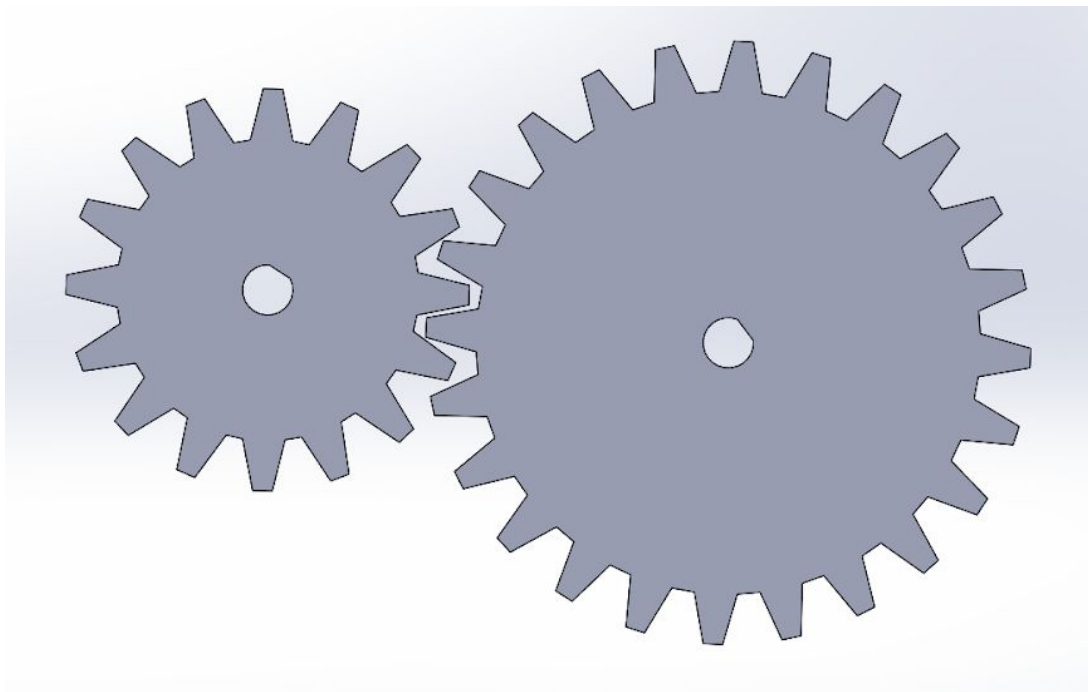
The resulting connection of the two finished gear SolidWorks parts.
